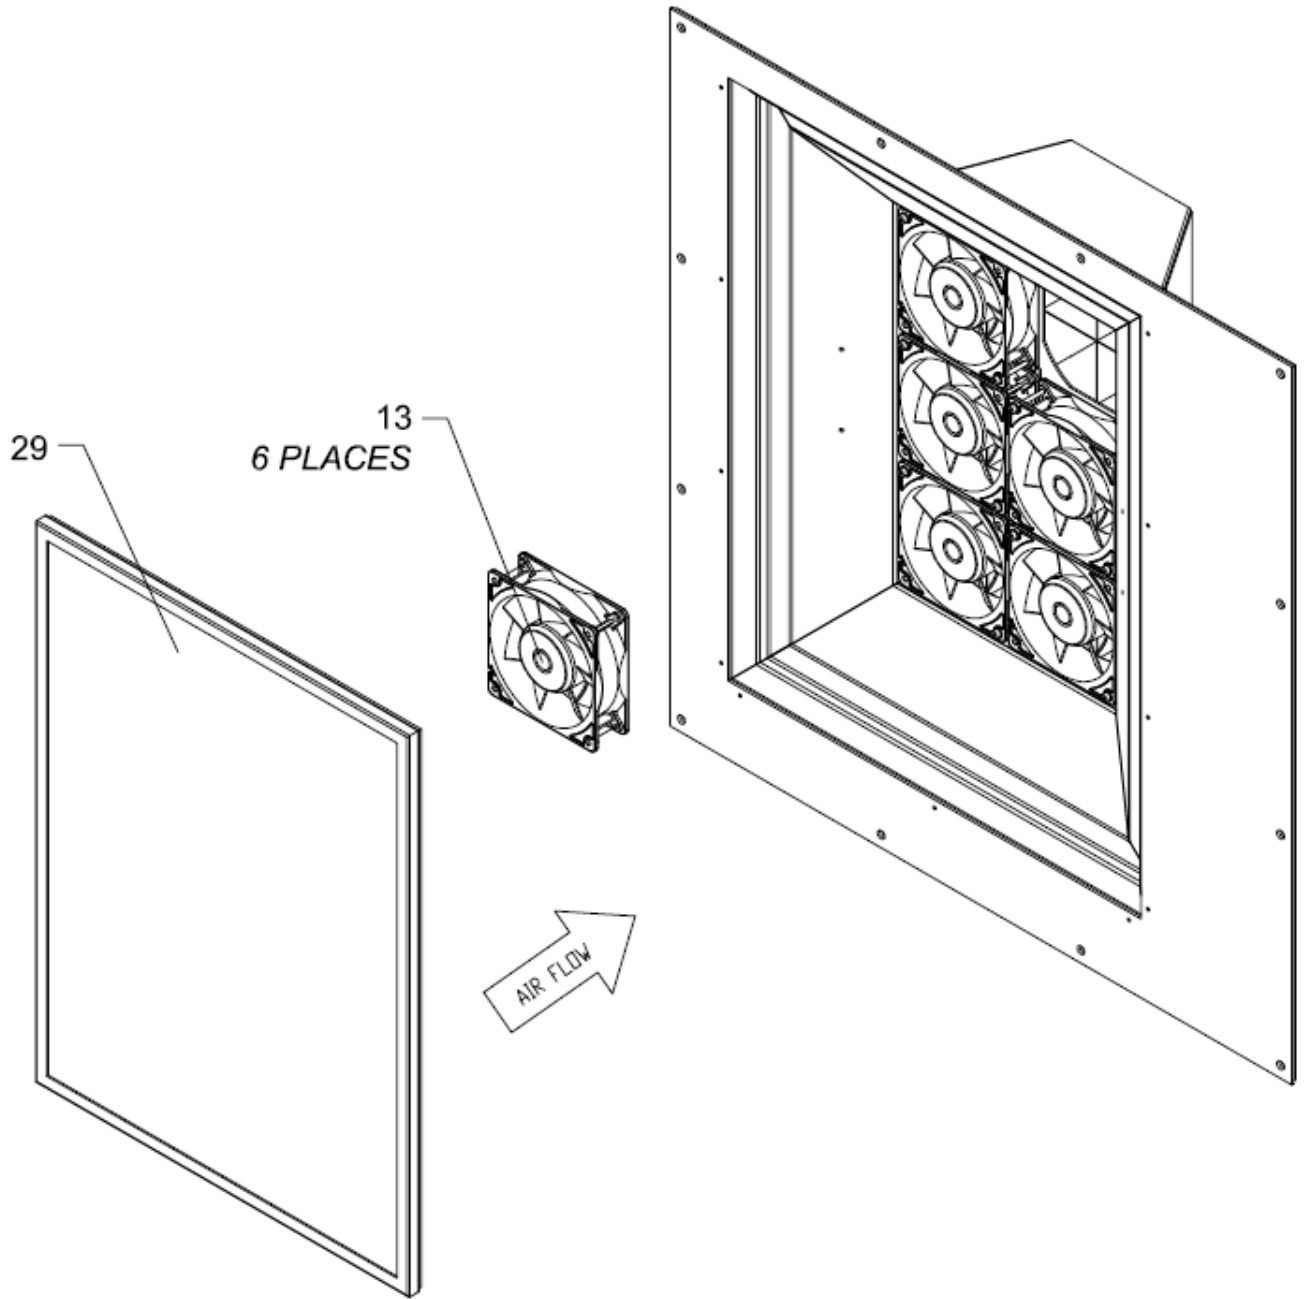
2500+ GPU Illustrated Parts List, Fan Assembly
